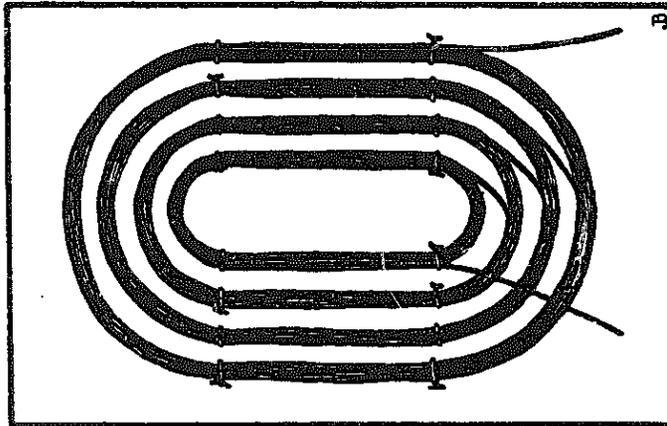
Representative pole group taken from winding machine. One advantage of this method of winding is the spacing between coils.
